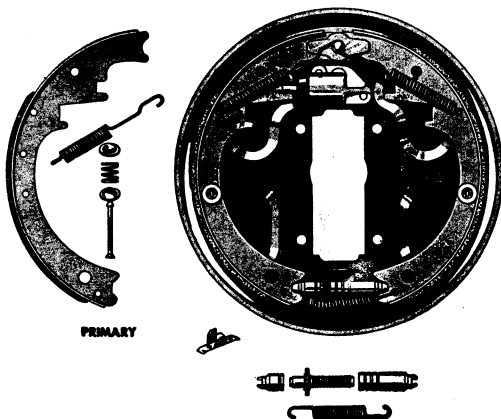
Bendix Uni-Servo brake with single piston wheel cylinder
